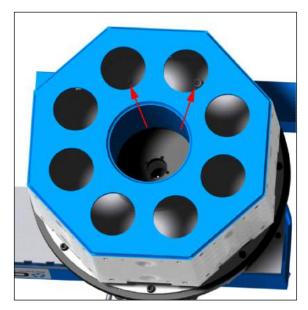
REMOVING BOLTS FROM CHUCK
